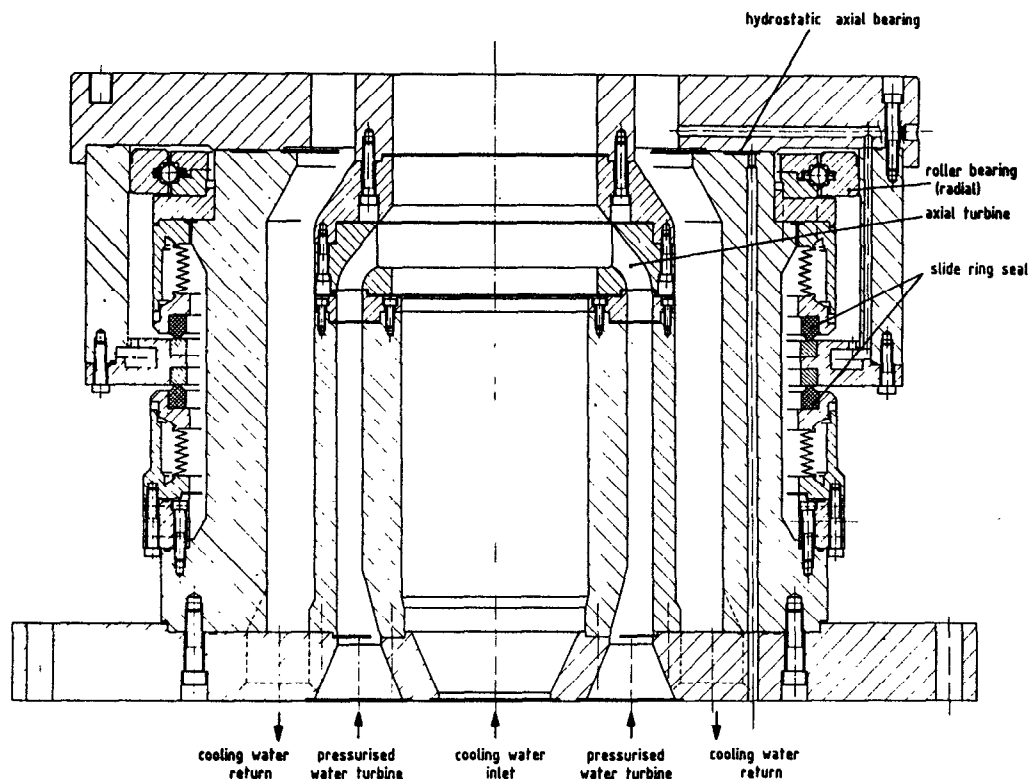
KLA type II for cooling water supply, support bearing and drive of target wheel (hydrostatic axial bearing, radial roller bearing and axial turbine as drive)
